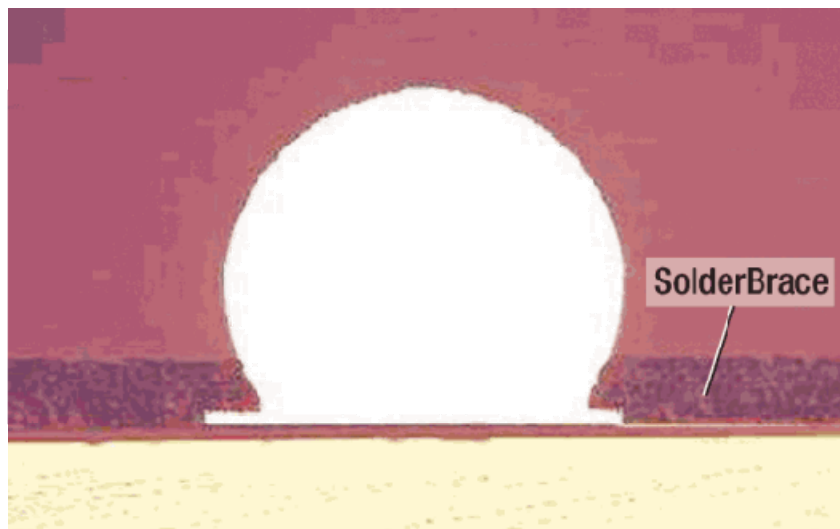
Cross section of a WLCSP 250µm solder bump supported by the thick front-side passivation SolderBrace [58].
